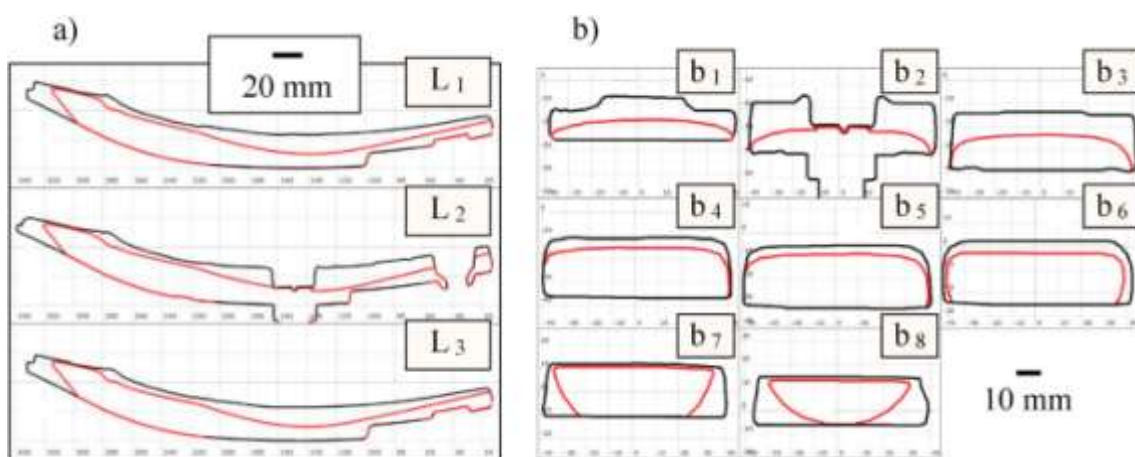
Cross-sections of the A/2 coulters (element installed on the second cultivator beam, sliding distance: 1524.9 km): a – longitudinal sections, b – perpendicular sections: b₁, b₂, b₃ – sections in the area of base material, b₄, b₅, b₆ – sections in the area of padding weld, b₇, b₈ – sections in the area of cemented carbide plates.
